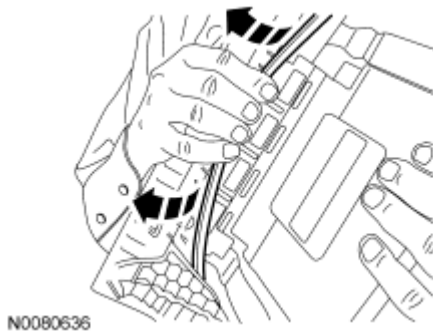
Lifting Passenger Air Bag Module Cover From Bottom Of Air Bag Module Canister & Separating Windows From Canister Hooks
